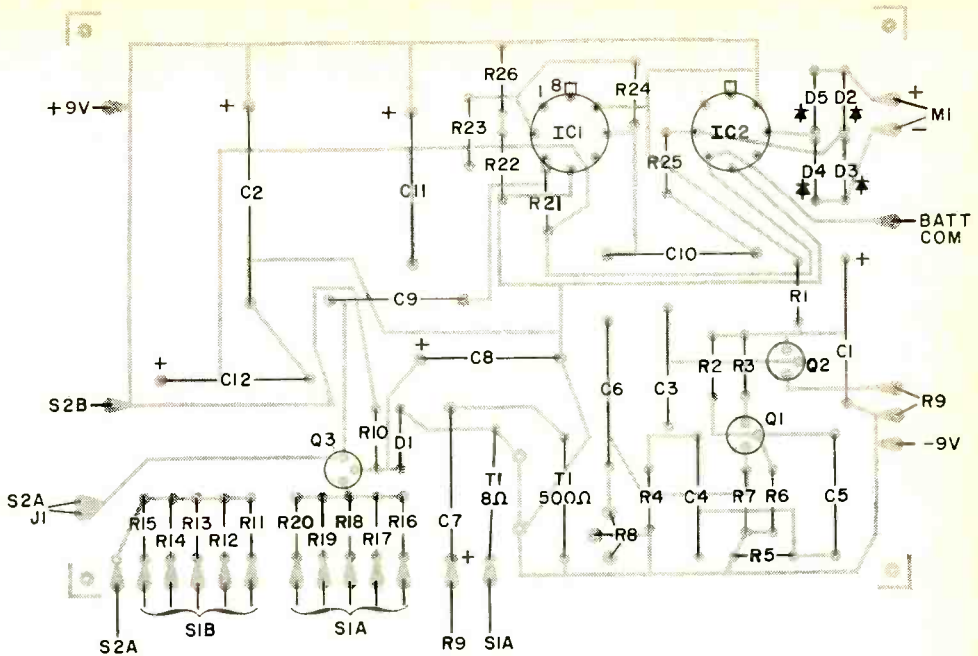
The actual size foil pattern for a PC board is shown on facing page, while component layout is above. Perf board construction may also be employed.
